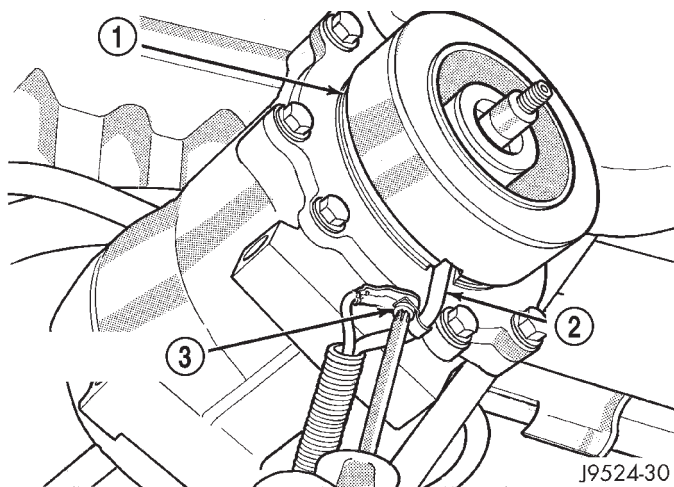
CLUTCH COIL LEAD WIRE HARNESS
